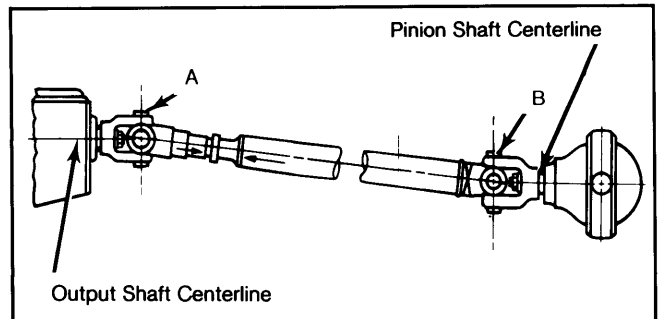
Alignment of 2-Piece Propeller Shaft Flange
